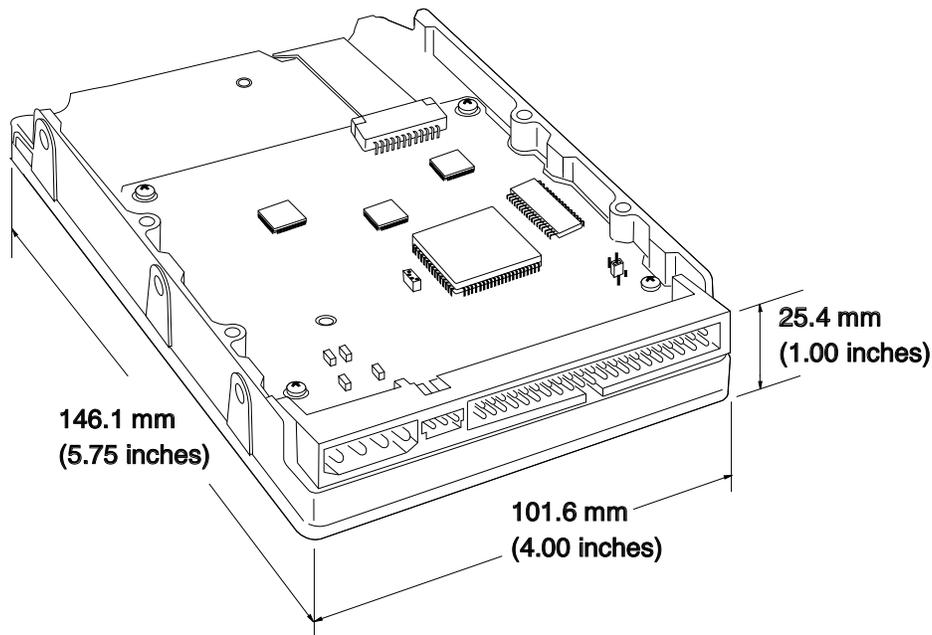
Mechanical Dimensions for Quantum Fireball TM (Two- and Three-Disk) Drives
